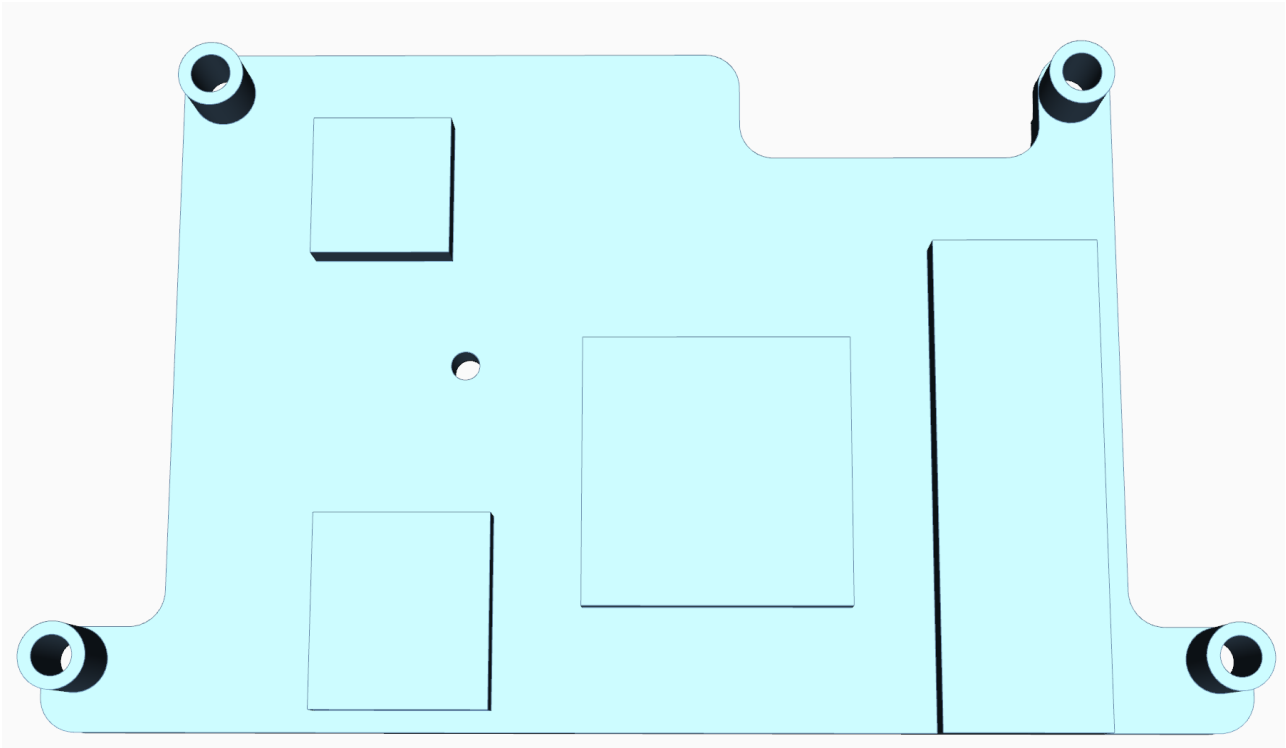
Heat Spreader 94-800913-3 Bottom Side View (faces SOM)
